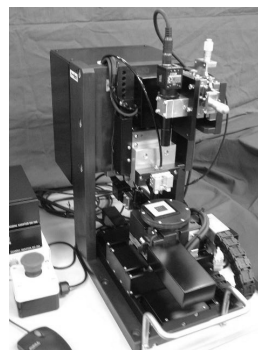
Smallest model of our assembly machines (the size of the base area is about A4 paper size)
